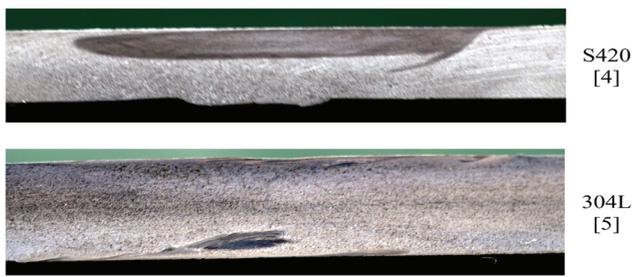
Macroscopic appearance of welded FSW joints - steels
